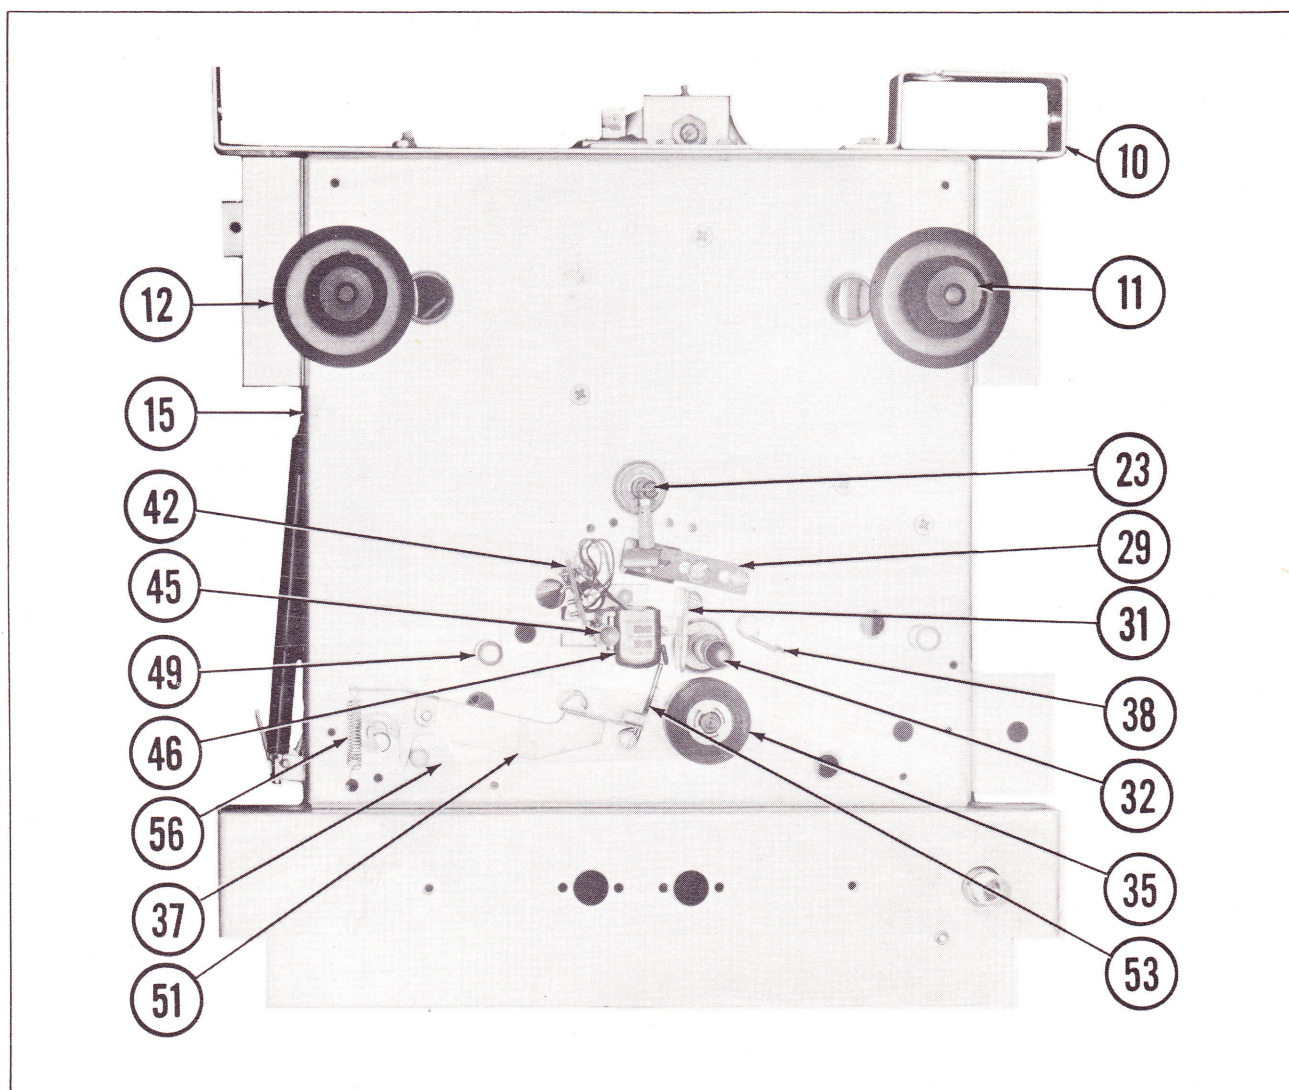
TOP VIEW OF MECHANISM WITH ESCUTCHEON REMOVED
